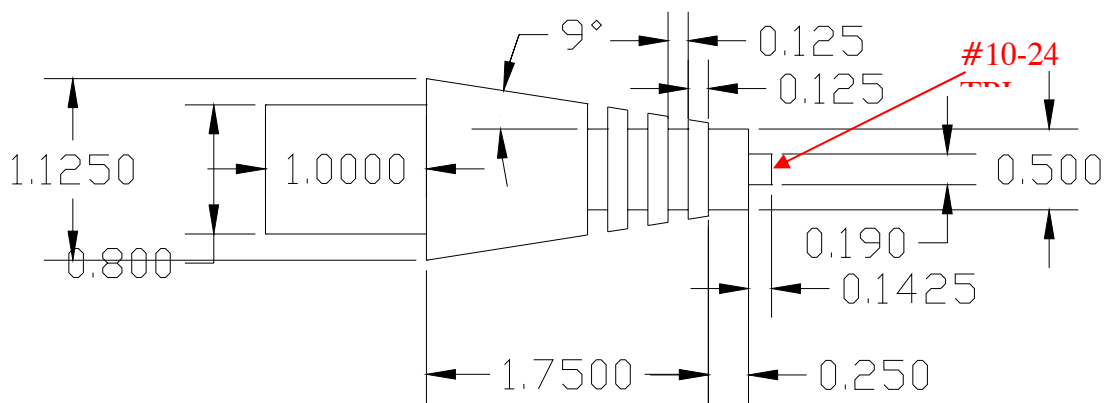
VU FSW tool with 0.5" shoulder and left hand 10-24 thread pattern.
